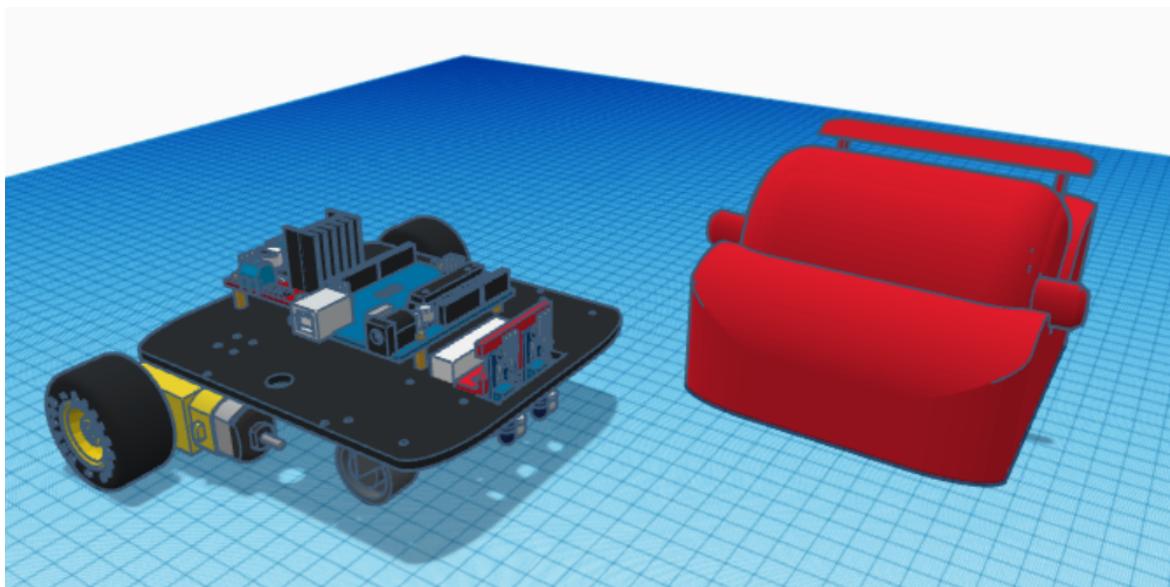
Final CAD design of prototype, including top case, chassis, components and screw holes.
